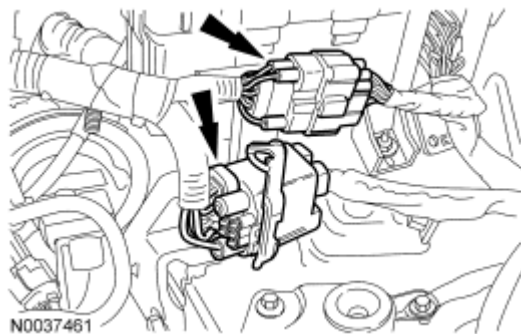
Locating Engine Wiring Harness Electrical Connectors
